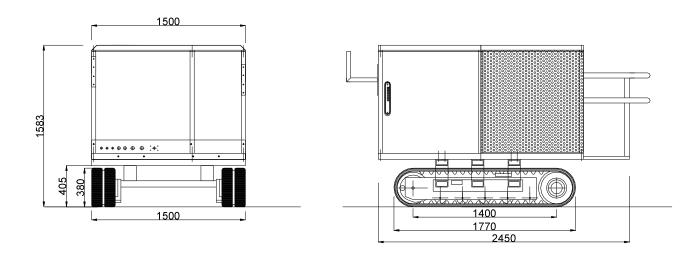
Top Hammer Power Pack Dimensions (in mm.)
